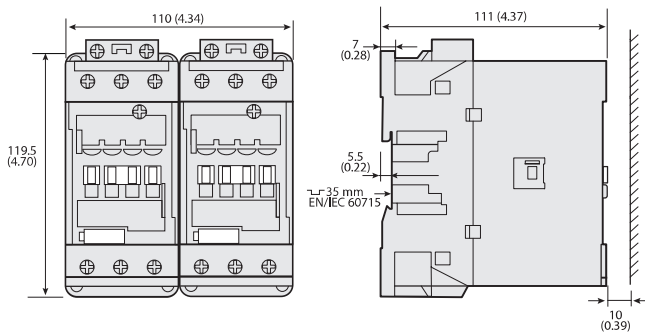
100-E40...100-E52 4-Pole Contactors with Front-mounted Auxiliary Contact
